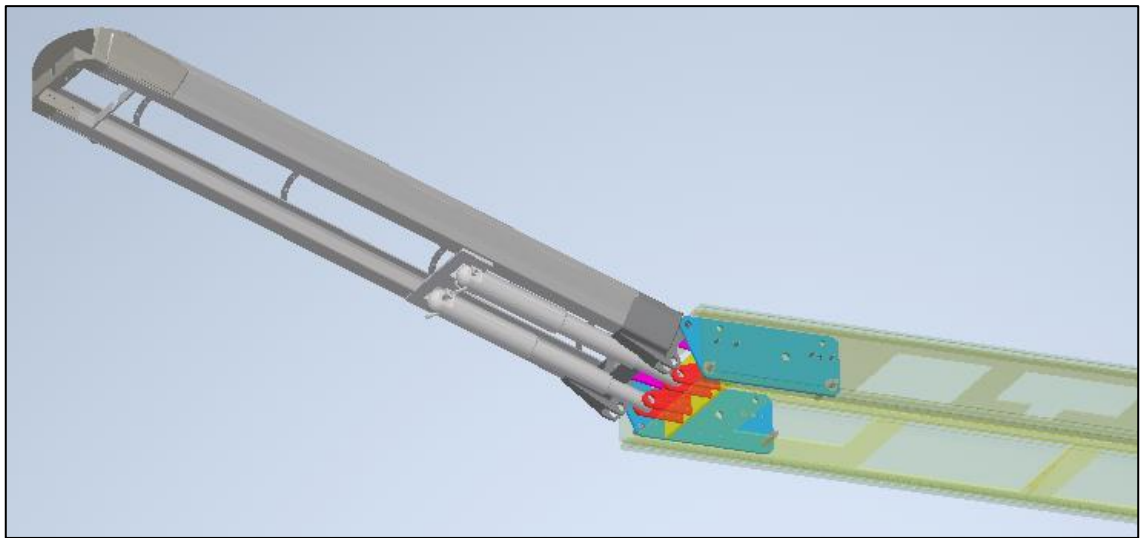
Bottom-side view of the passerella inclined towards the sky
